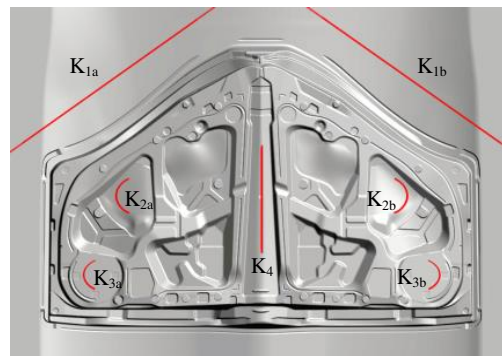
Distribution of the edge-cutting and the notch cut introduced in the drawing process
